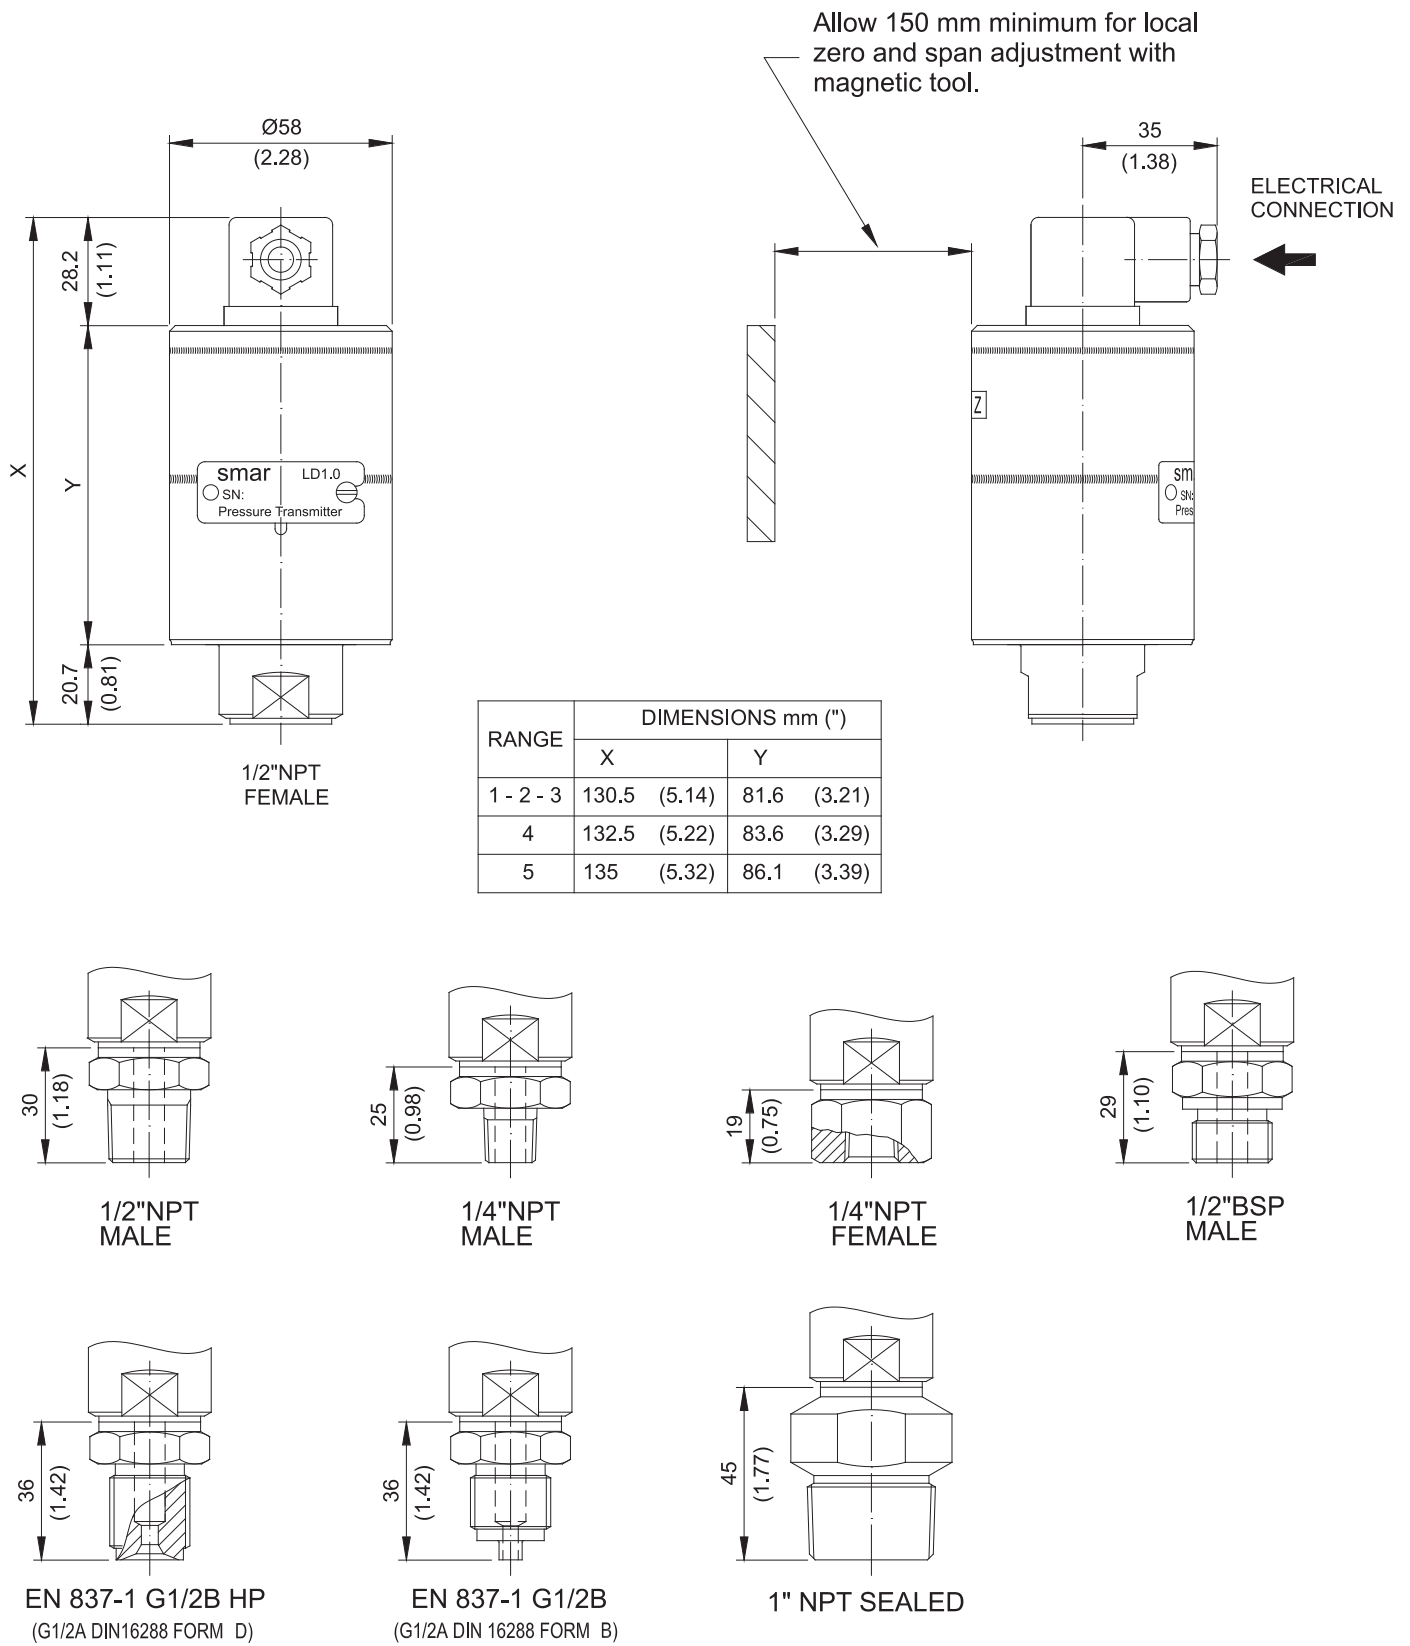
Dimensional Drawing and Mounting Position for LD1.0
